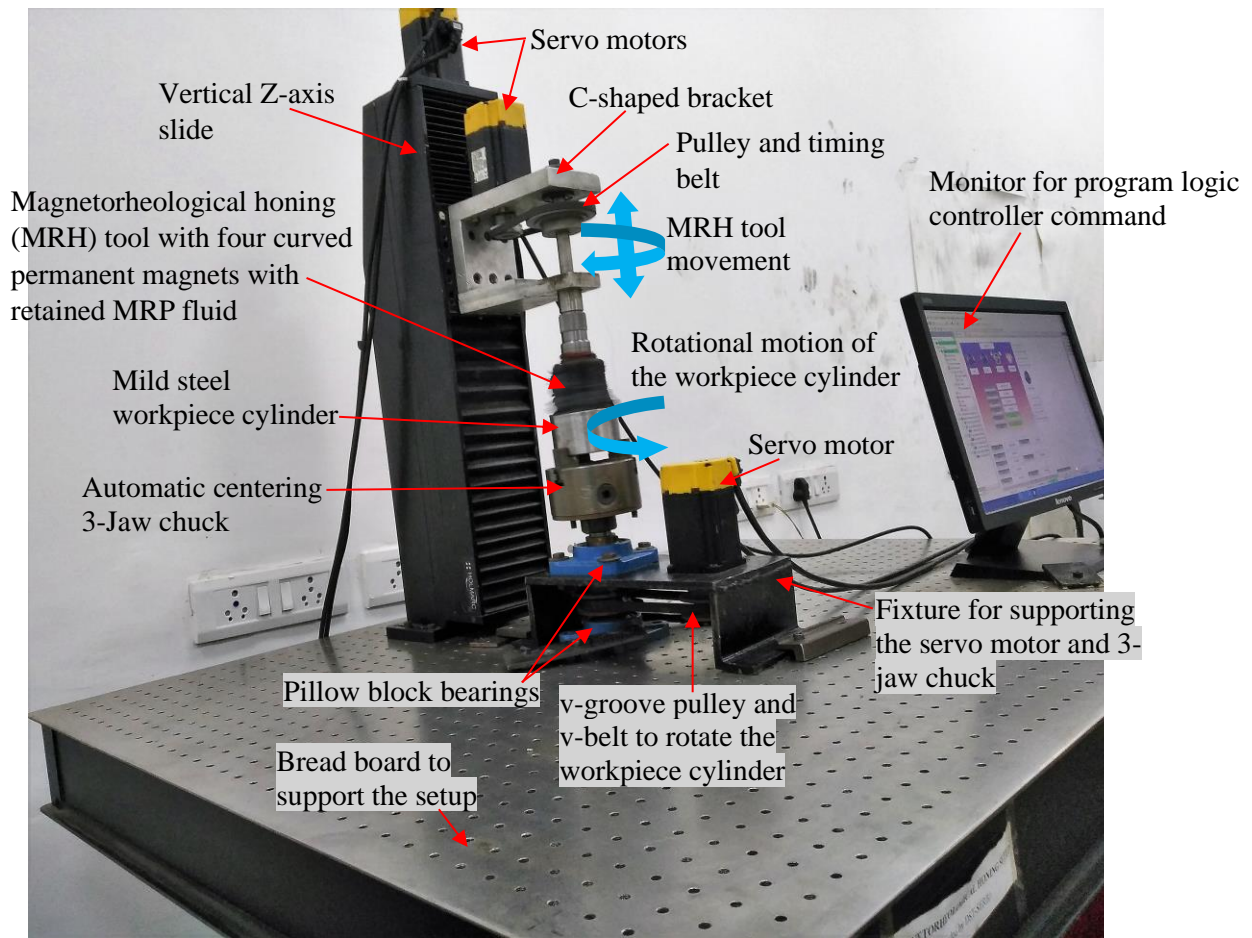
Photograph of the improved rotational magnetorheological honing (R- MRH) setup with the automatic-centering 3-jaw chuck fixture for holding different sizes of the cylindrical workpieces.
